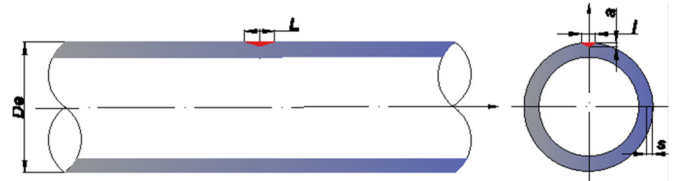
Technical drawing of a pipe with longitudinal surface defect.
